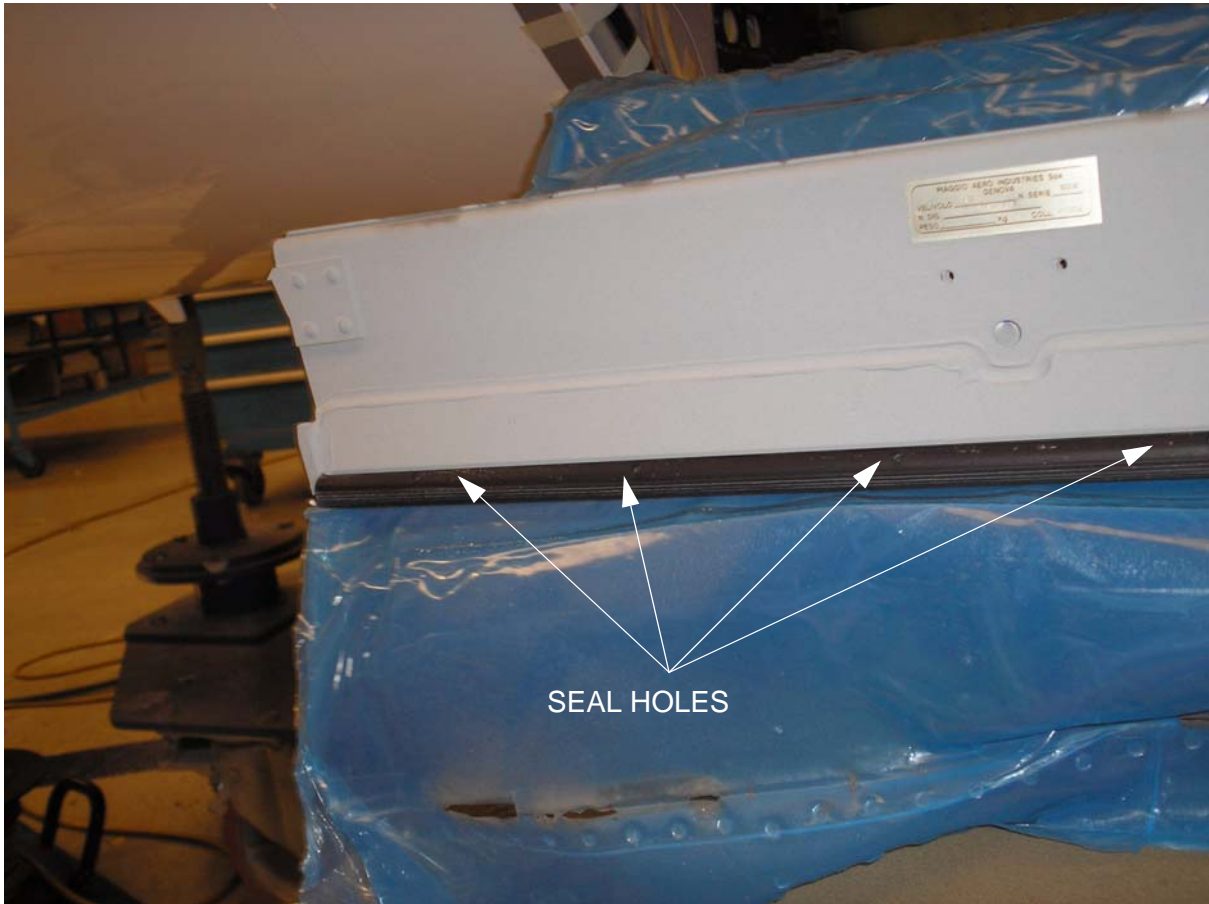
Cabin Lower Door Seal - Removal / Installation (Sheet 2 of 3)
